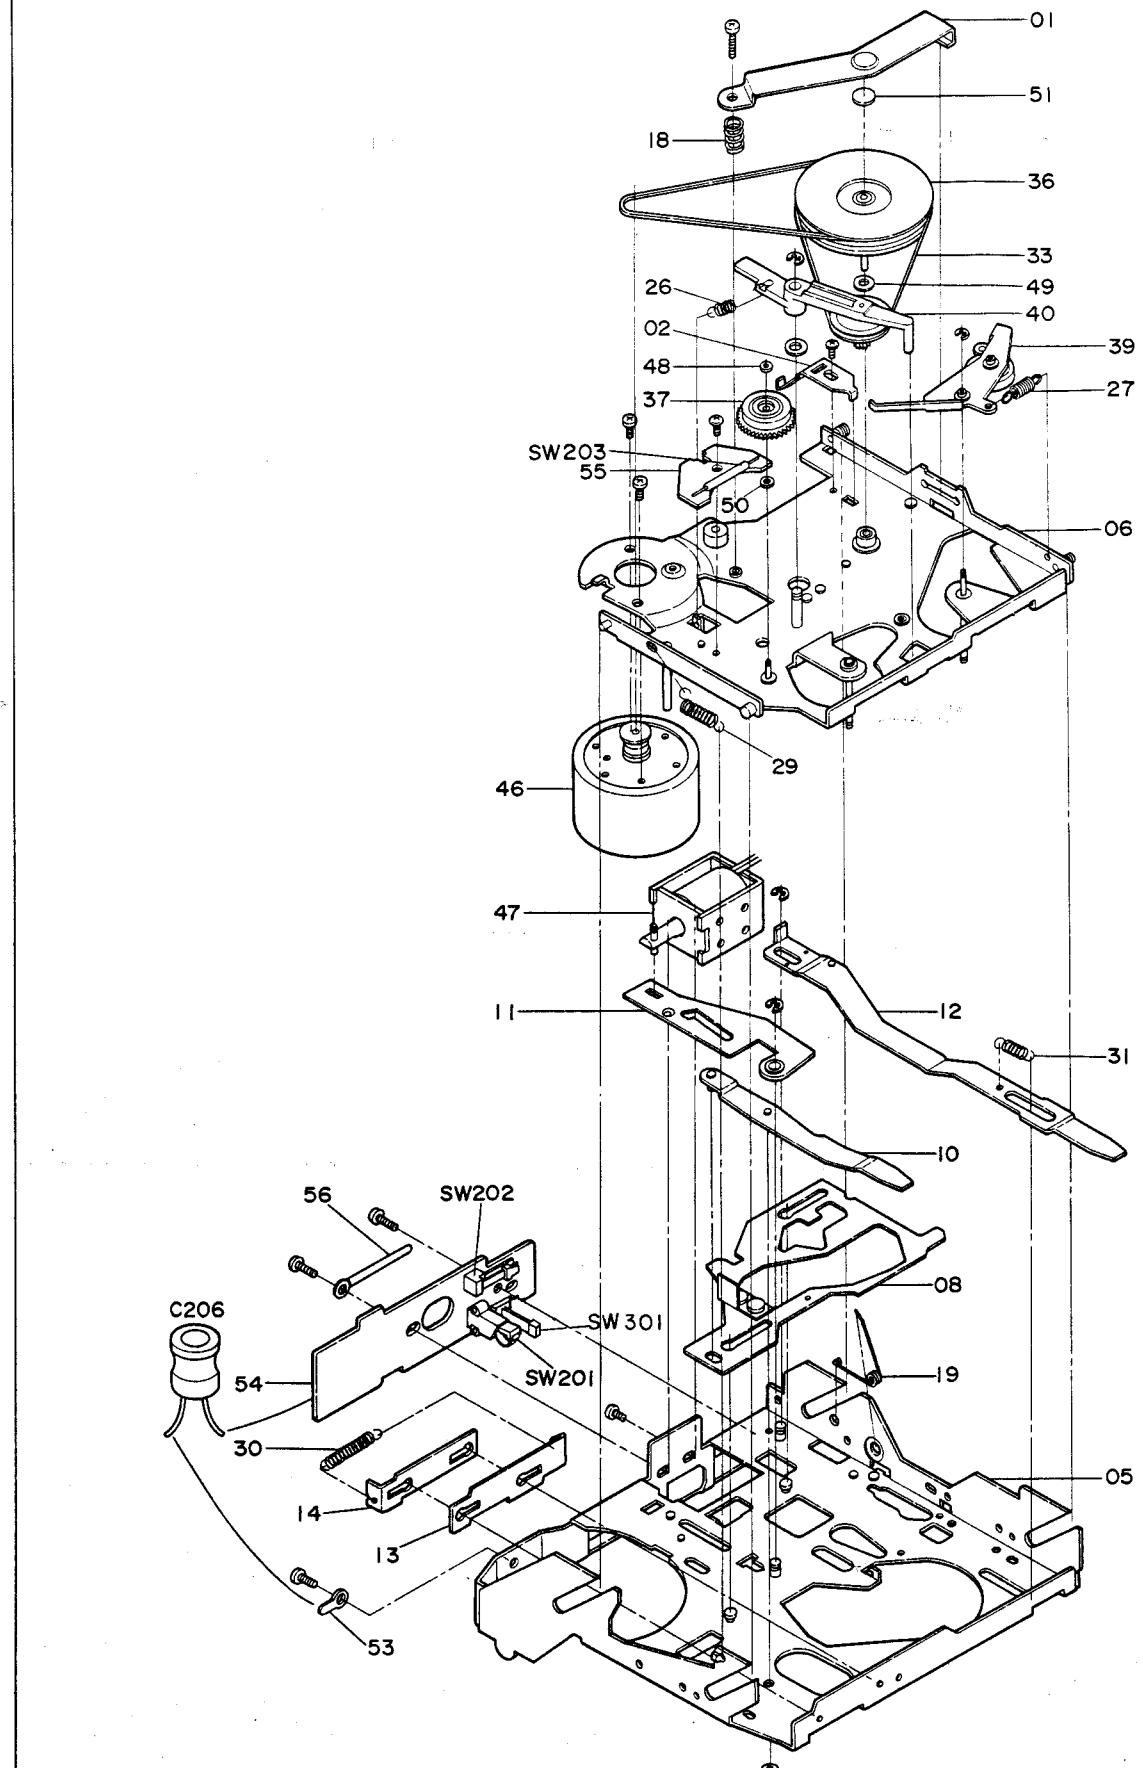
MECHANISM EXPLODED VIEW (UPPER SIDE)
